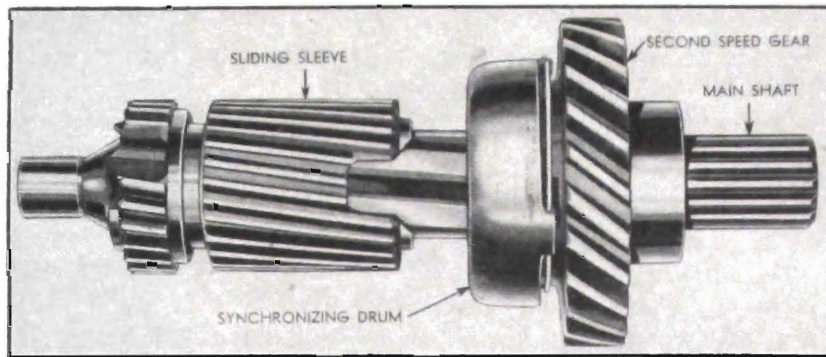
Transmission Main Shaft Assembly—Series 40
